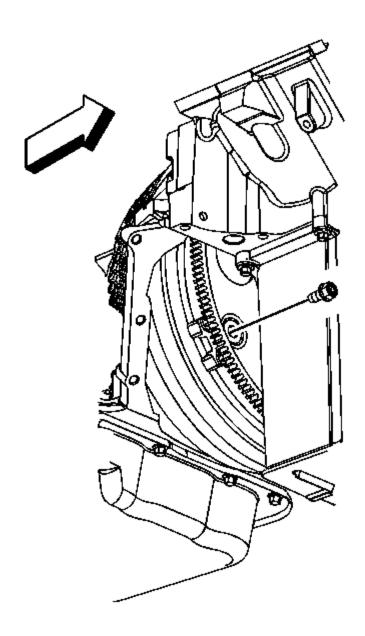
View Of Flywheel To Torque Converter Bolts Courtesy of GENERAL MOTORS CORP.
